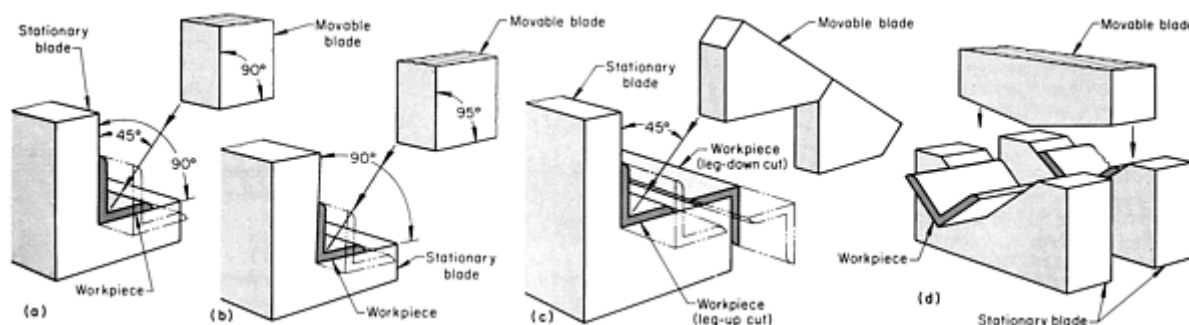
FOUR TYPES OF BLADES FOR THE CUTTING OF ANGLE SECTIONS. (A) TO (C) CUTTING IN A COMBINATION MACHINE. (D) DOUBLE-CUTTING METHOD
